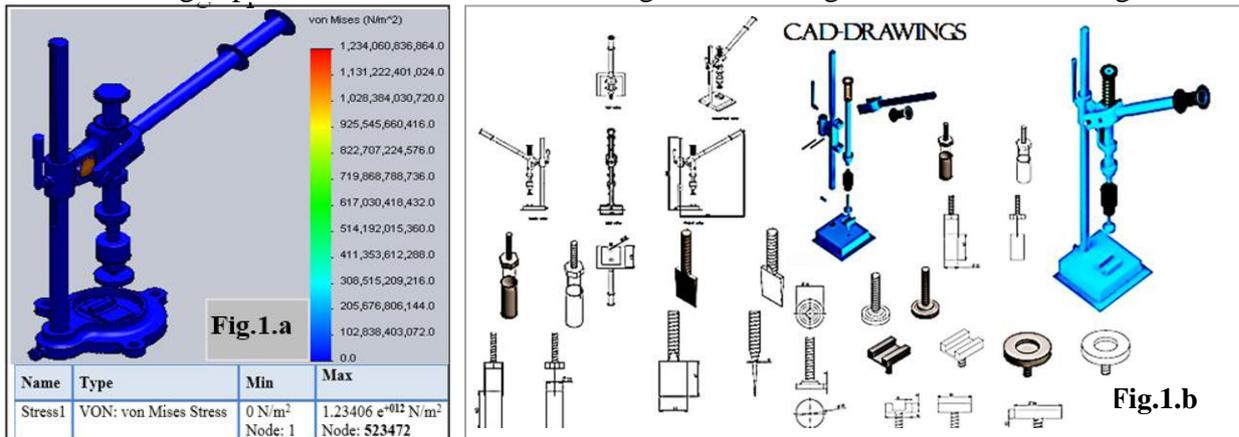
a.CAE-Simulation of MNPH machine; b. CAD-drawings of MNPH cutting tools and fixtures
